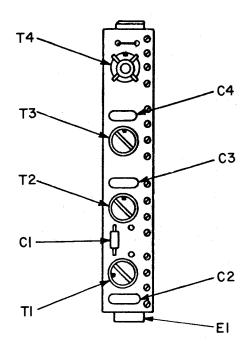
12 MHz Subassembly A2A4A2, Component Locations
